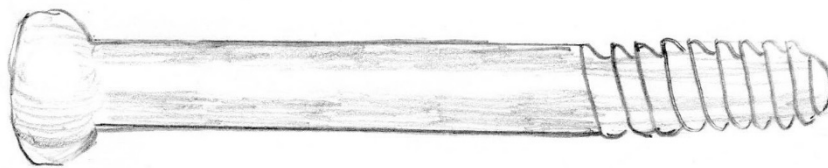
Partially threaded shaft screw that is supposed to have better fatigue resistance than a threaded screw.
